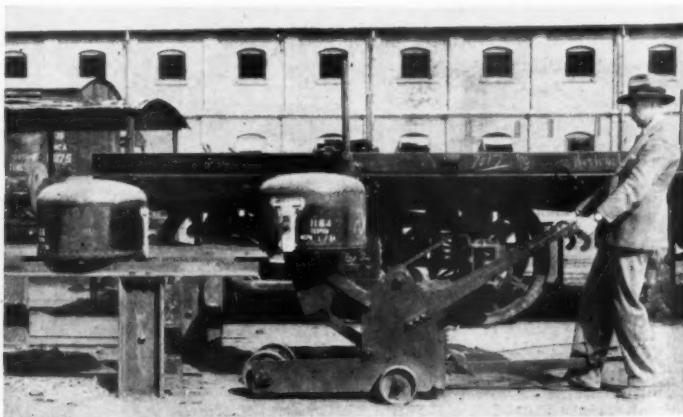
(right)—The cylinder removed and being conveyed to the storage rack prior to testing
